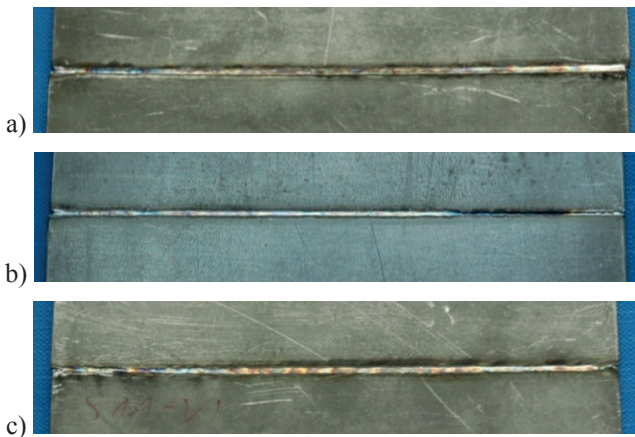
A view of the weld root (bottom) of the test joints of 0.8 mm thick electro-galvanized steel sheet DC04, autogenously welded by a disk laser (Table 4); a) J1, b) J2, c) J3
